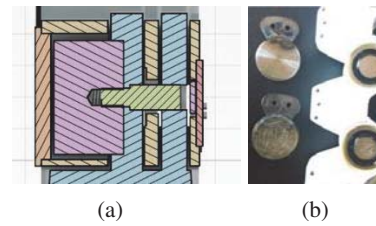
Joint Design with electromagnets mechanism. From left to right: a) Joint with the electromagnets, b) electromagnets and metal plate
